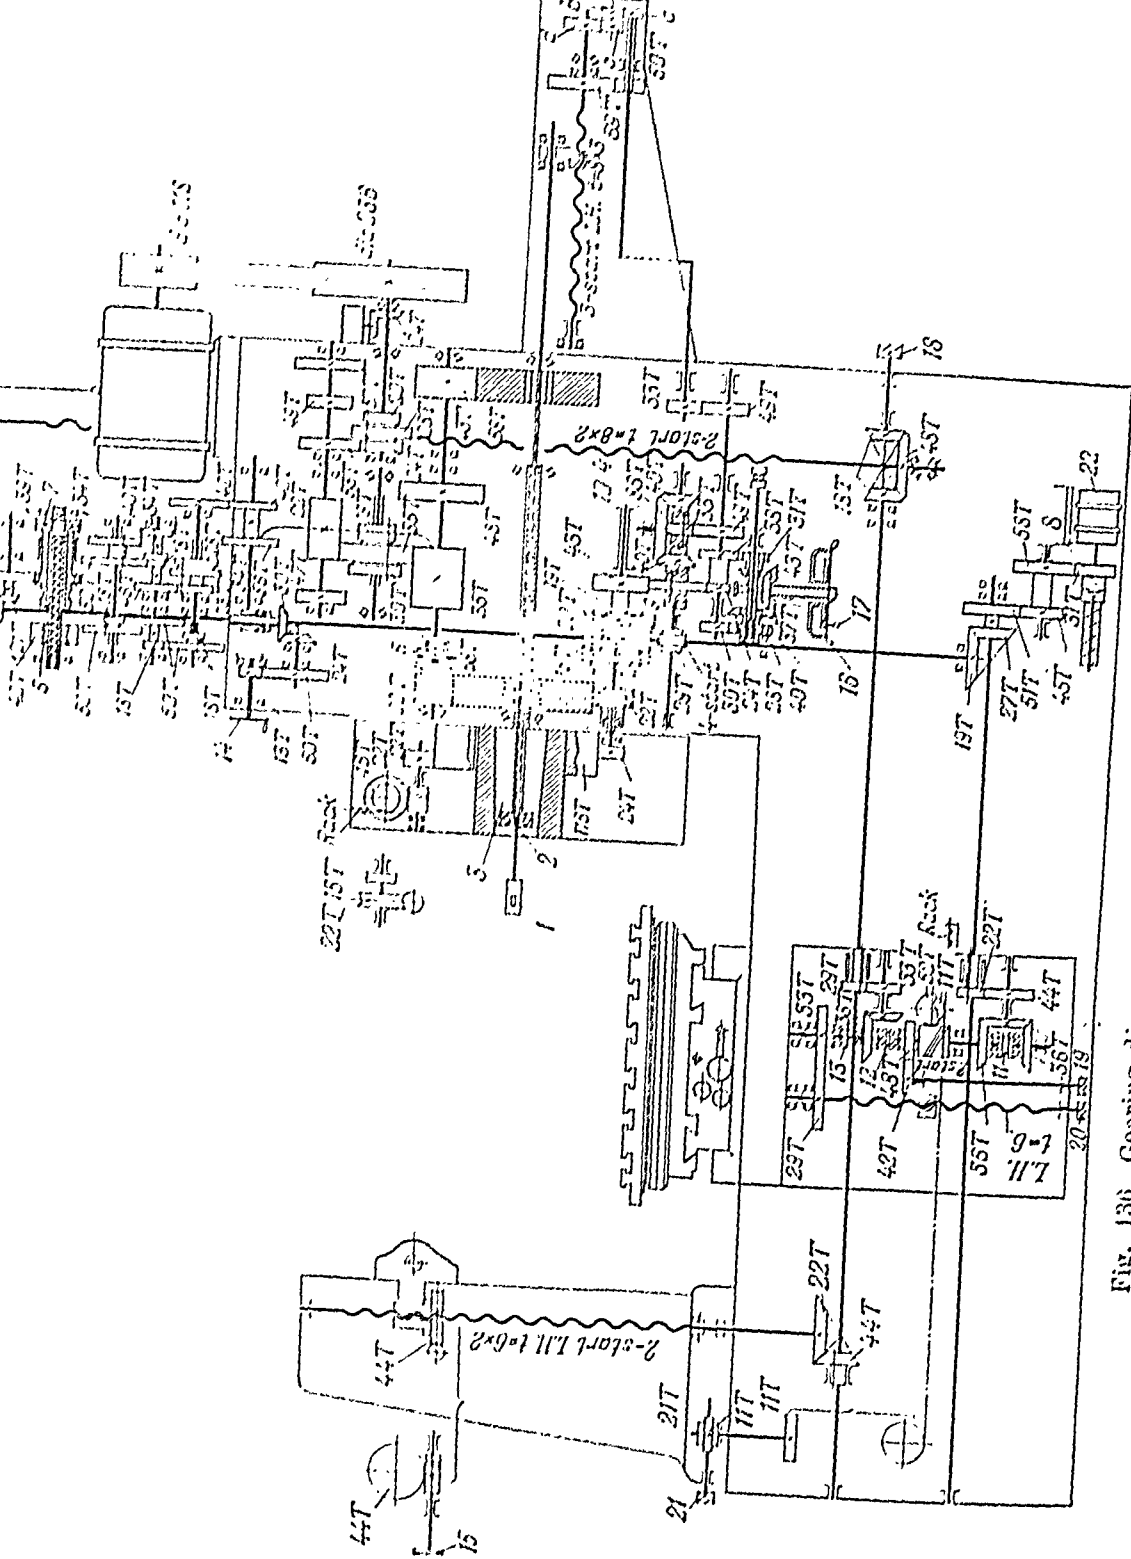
Gearing diagram of the model 202F horizontal boring machine
